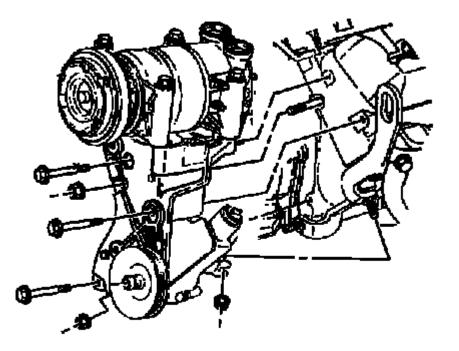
View Of Power Steering Pump Bracket Courtesy of GENERAL MOTORS CORP.
